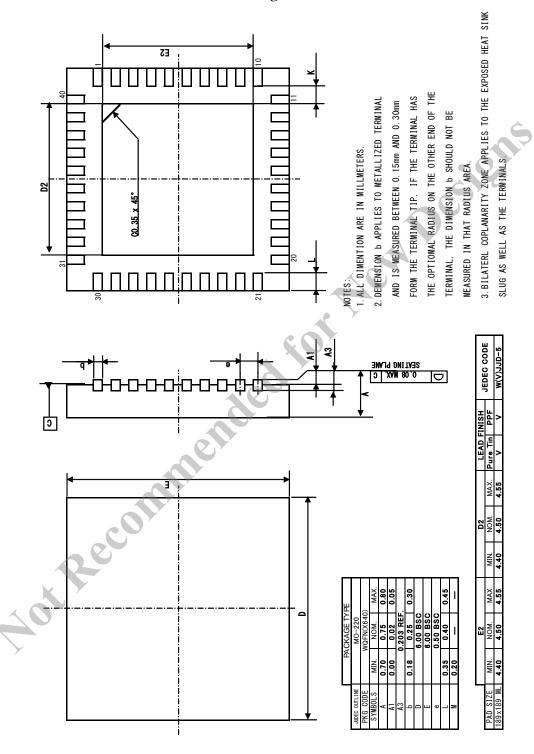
QFN40\_PKG\_dimensional outline drawing.
